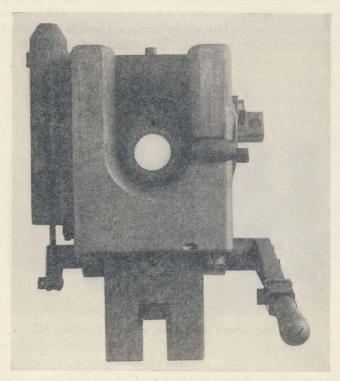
Breech Mechanism, 75-mm. Gun, M1.
